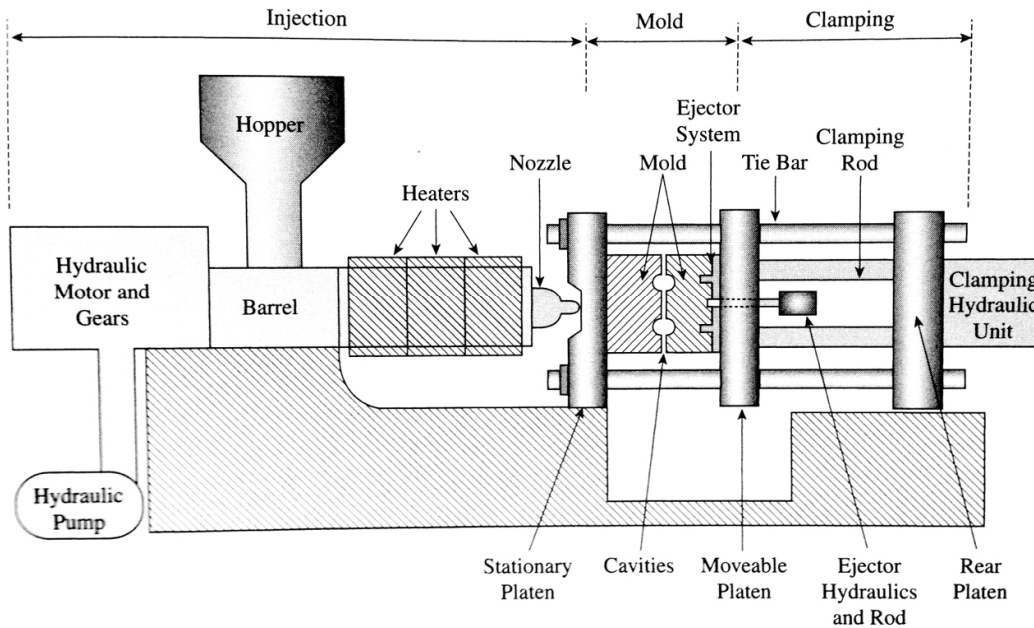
Illustration of an injection moulding machine showing the main sections and parts (Strong 2006)
